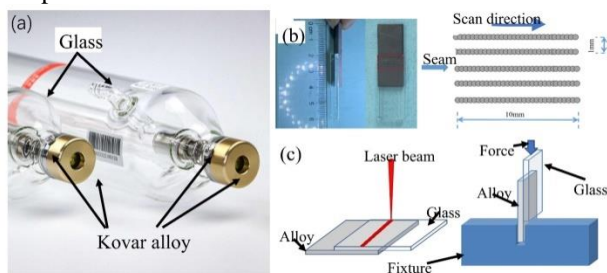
Laser glass tube for carbon dioxide laser (a), glass to metal sealing samples formed by laser welding (left sample) and its scan direction (right picture), a typical example for glass to metal sealing (b), and schematic illustration of the glass to metal sealing sample welded by laser welding process (left picture) and the shear test (right picture) (c) (drawings not to scale)
